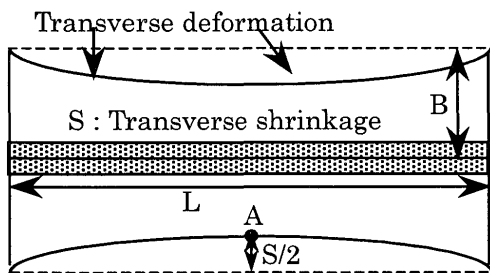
Schematic of deformed configuration of welded plate.
